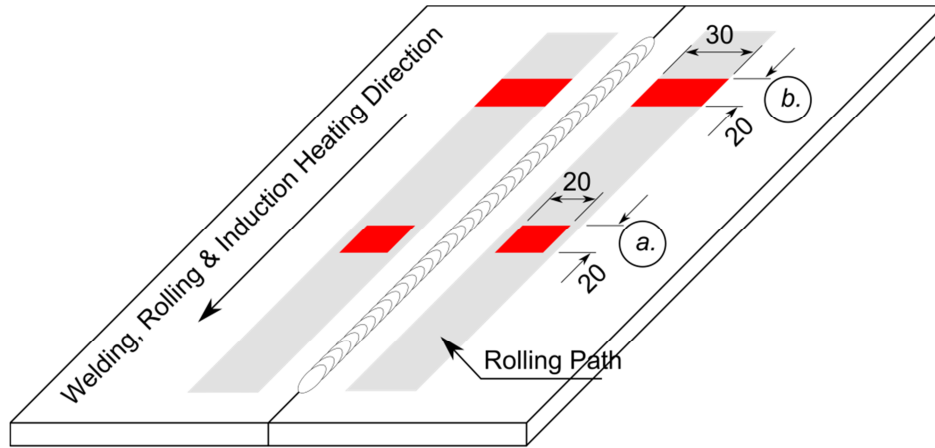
Schematic representation of post-weld induction heating after pre-weld rolling. *a.* Smaller heat source; and *b.* wider size (dimensions in millimetres).
